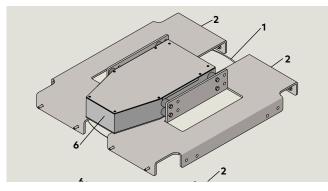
Mounting plate with overhead speed control mounting, 24" spacing
